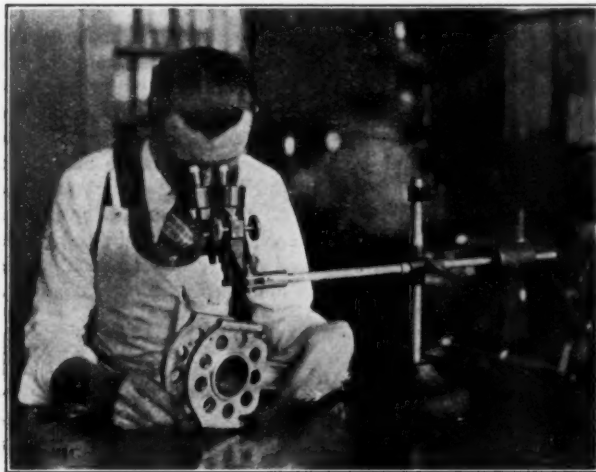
EXAMINING FINISHED MASTER ROD WITH 32-POWER BINOCULARS
